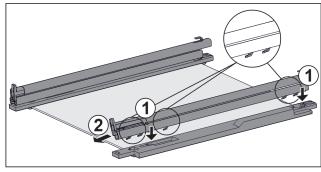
Glass shelf with rails and retaining parts Install rail with damping mechanism:
